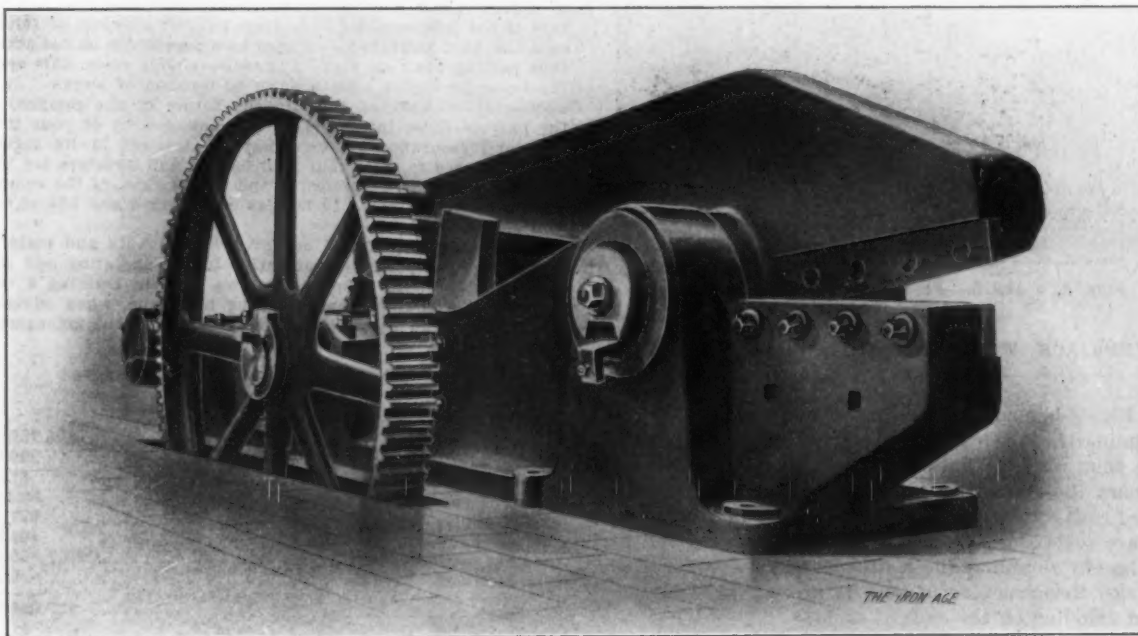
Front Side View, Showing Jaws and Lever Adjustment.
